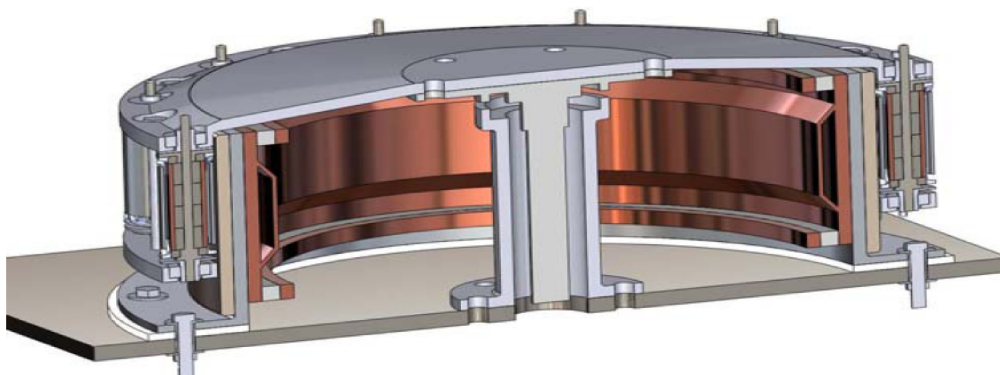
A cross sectional view of the device showing the laminate layers, the magnetic rollers and drive shaft.
